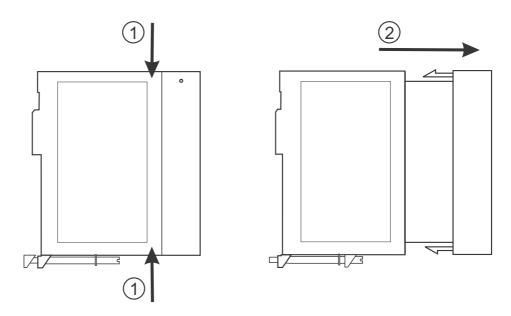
Opening the module to access jumpers on the printed circuit board
